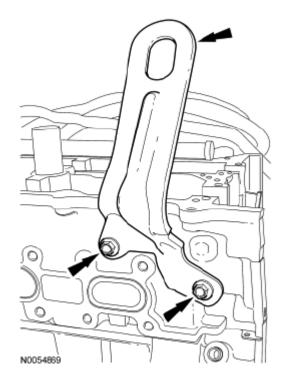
Locating Engine Lifting Eye With Bolts Courtesy of FORD MOTOR CO.
